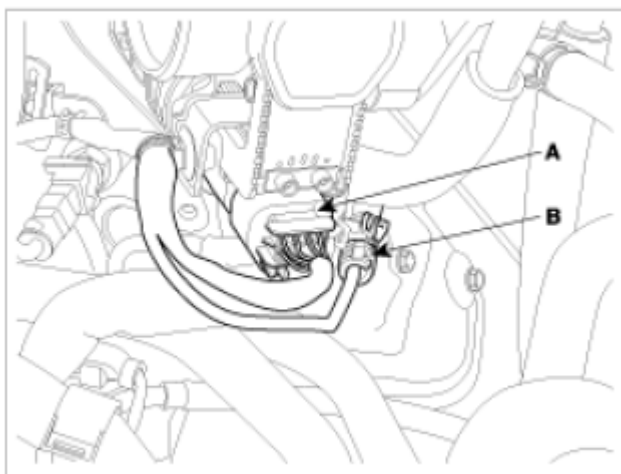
Identifying PCSV Connector, MAP Sensor Connector And PCSV Hose (3.3L)
